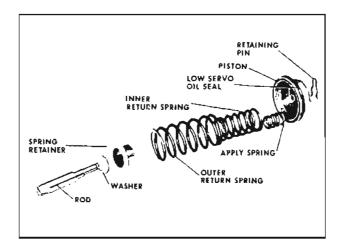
Low Servo Piston Assembly (Exploded)
